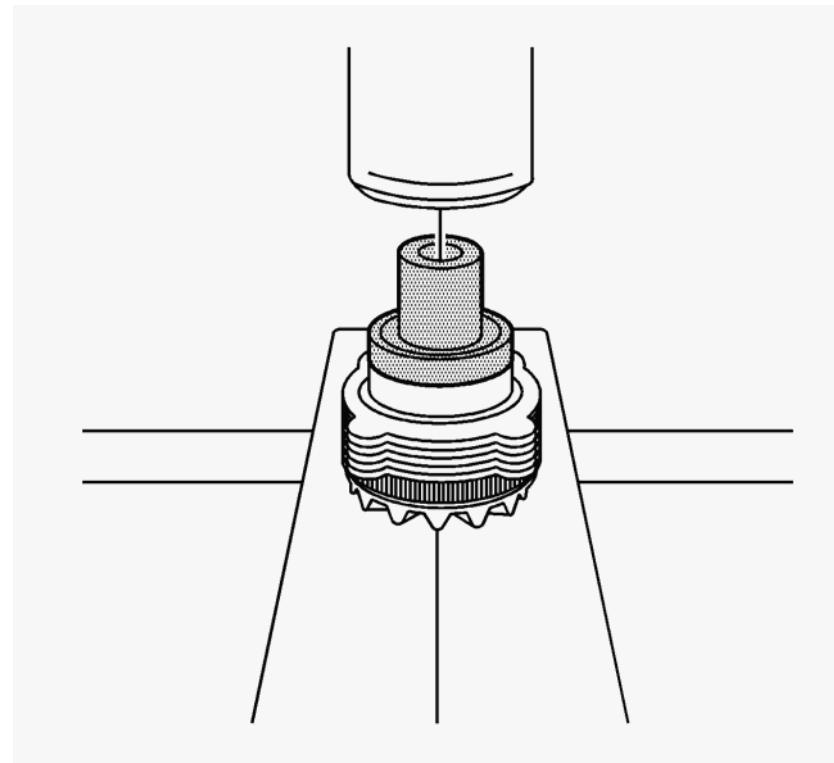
Installing Thrust Sleeve Onto Cam Side Gear
